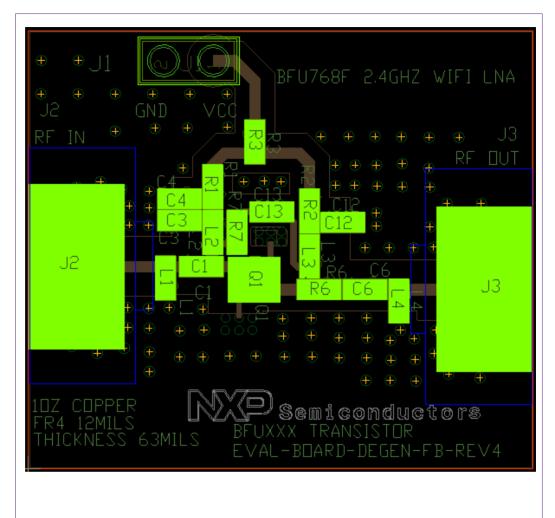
BFUXXX Universal Demo Board/BFU768F 2.4-2.5GHz WiFi LNA EVB Demo Board
